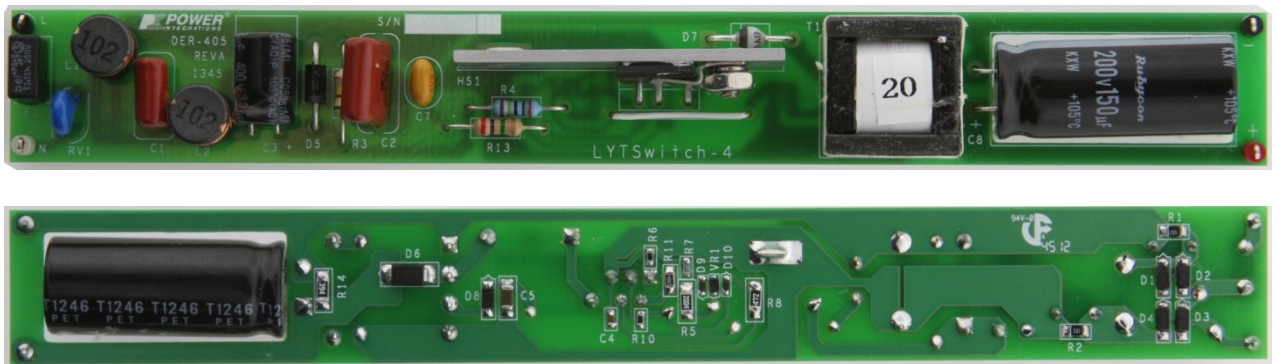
Populated Circuit Board Showing Top and Bottom Views
